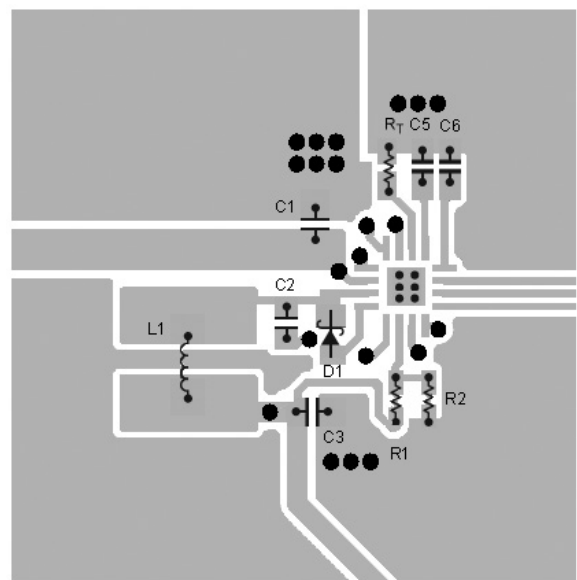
Example Layout for QFN Package. A Good PCB Layout Ensures Proper Low EMI Operation
